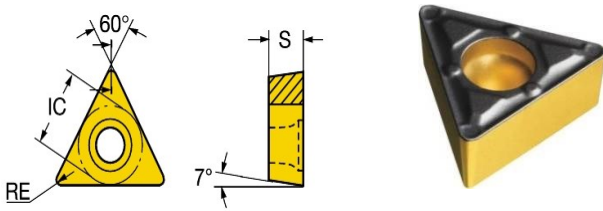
KTCMX-WF Cutting edge dimensions and shape
